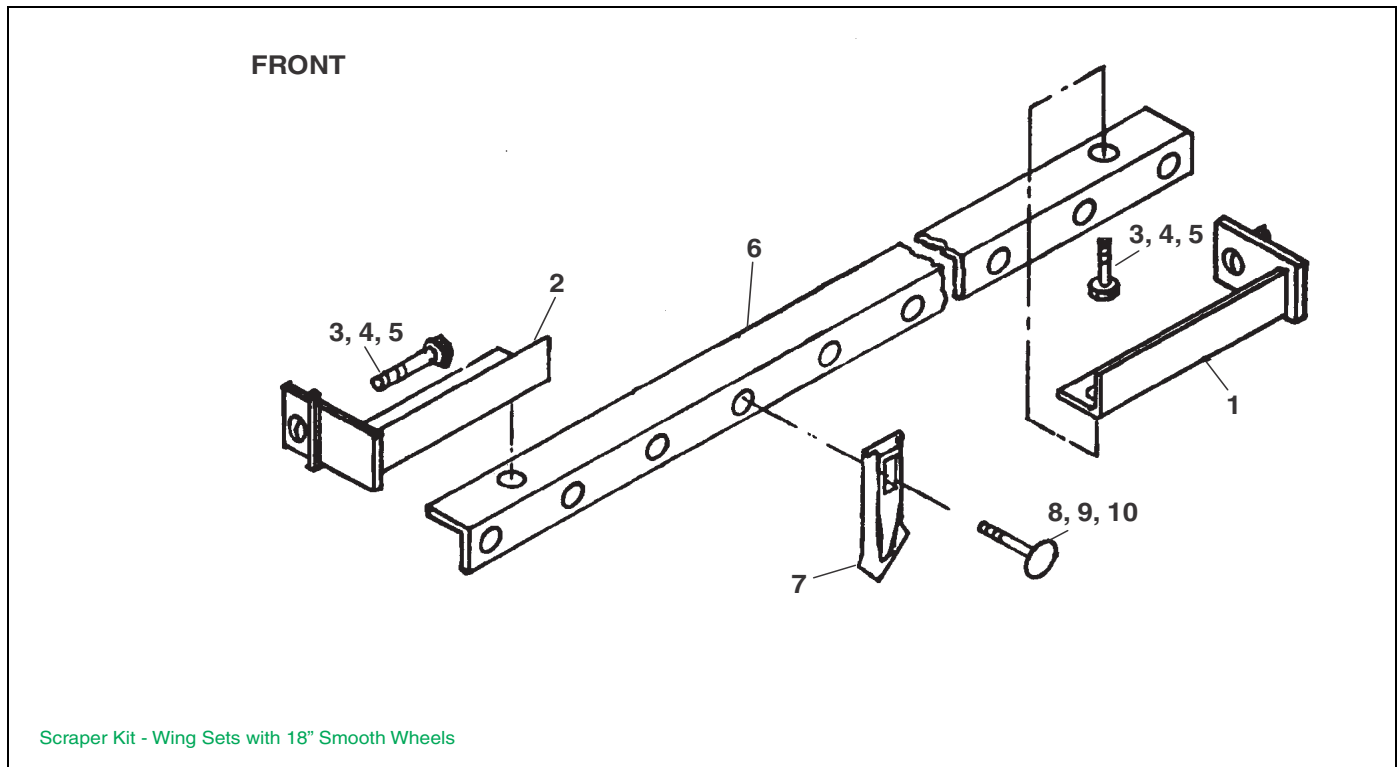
Scraper Kit - Wing Sets with 18" Smooth Wheels - Optional
